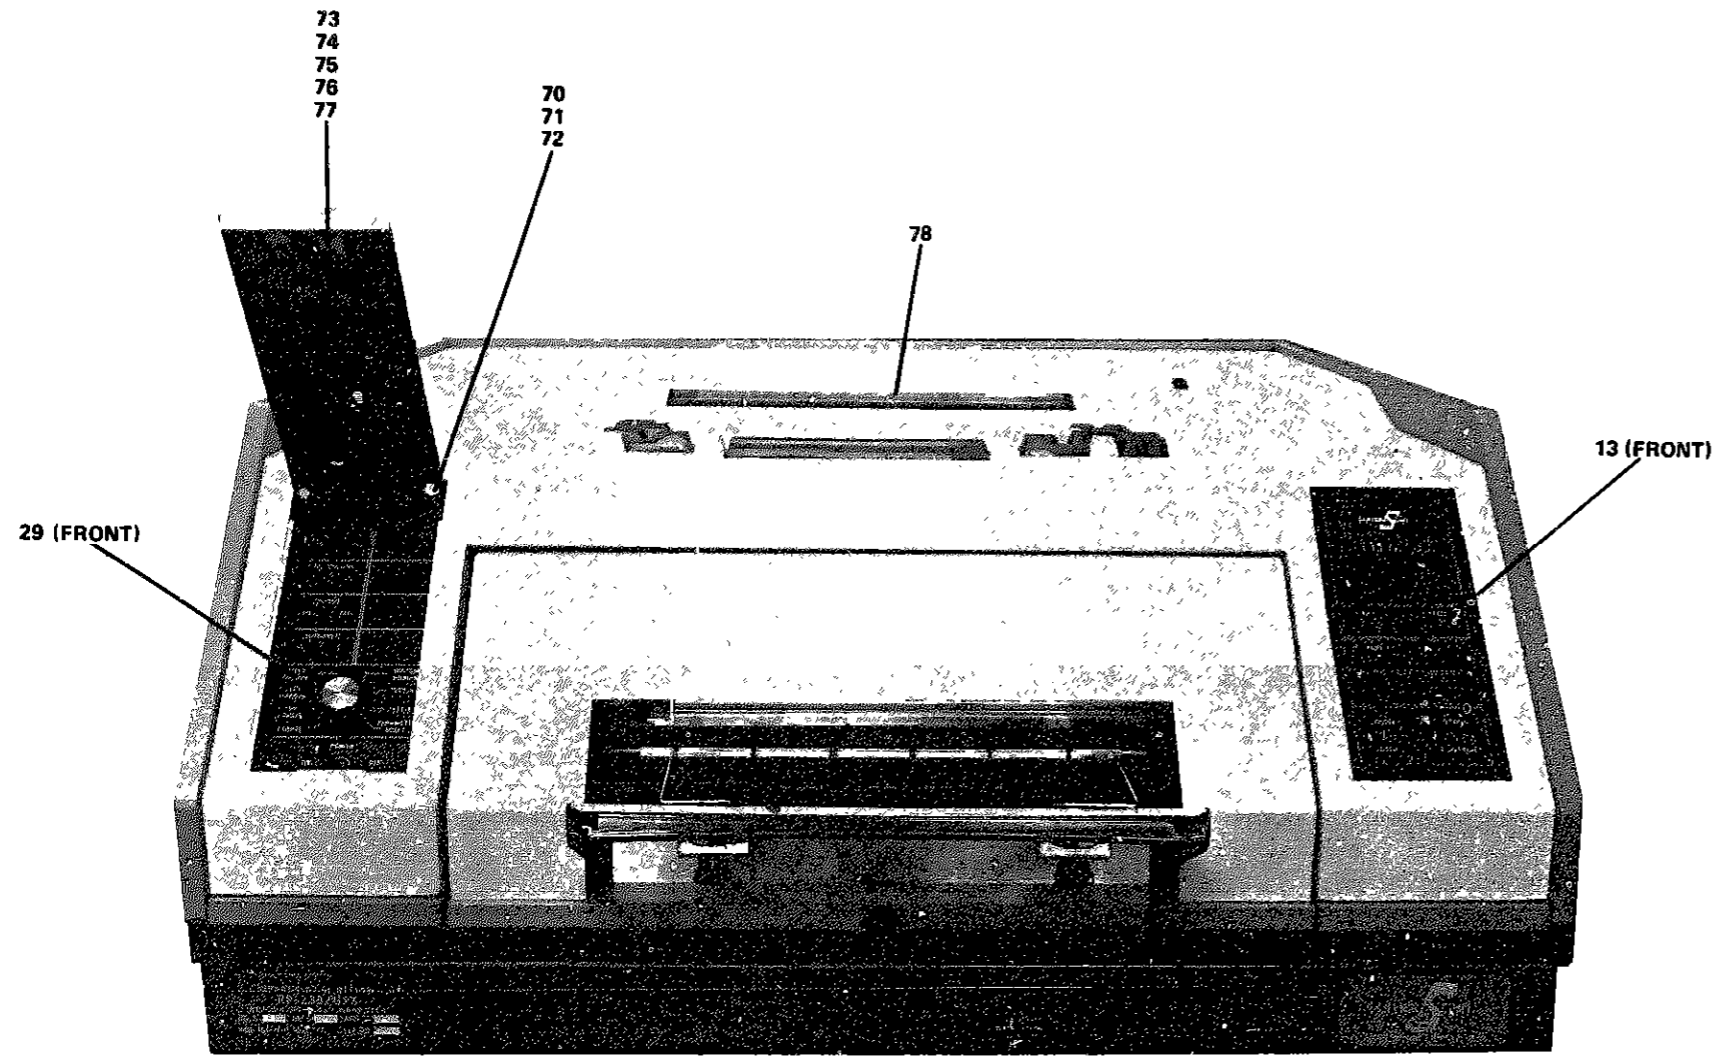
CONTROL CONSOLE ASSEMBLY TOP 1A6 (SHEET 5 OF 6)
